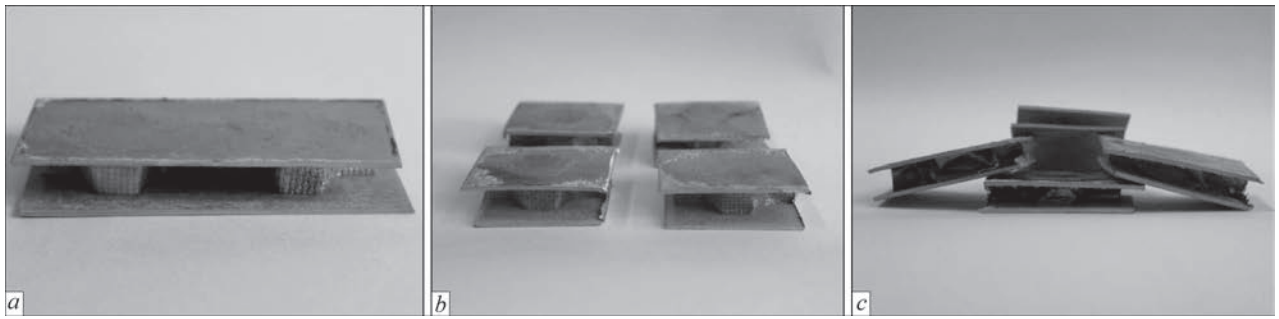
Specimens of the honeycomb panel produced by the method of VDW: *a* — after welding; *b* — elements of a three-layer panel after cutting with an abrasive disc; *c* — after mechanical compression tests
